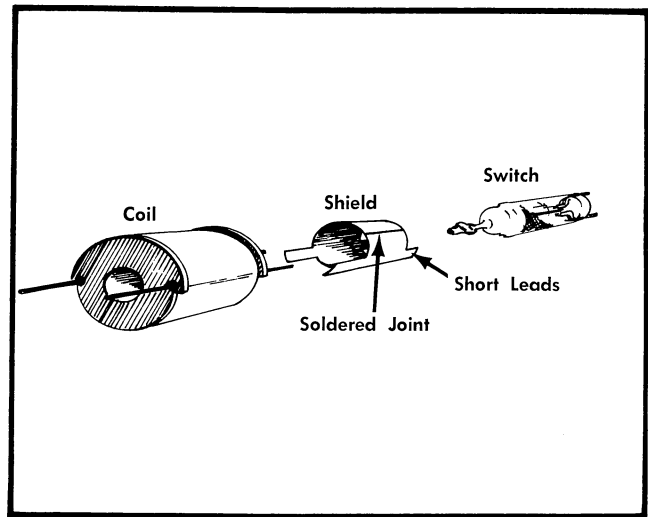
Physical arrangement of the coil, shield and switch prior to assembly.
